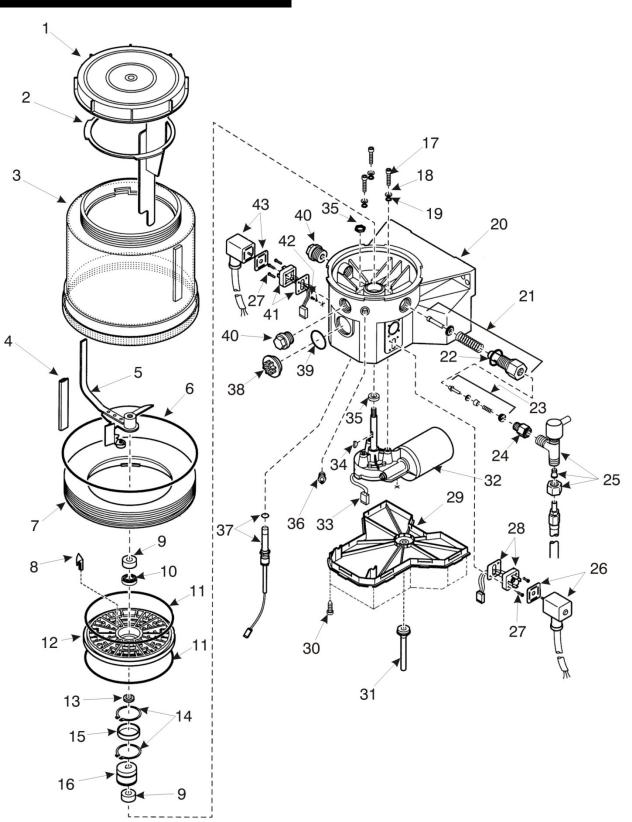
Basic Pump Assembly BreakerLube CML Series
